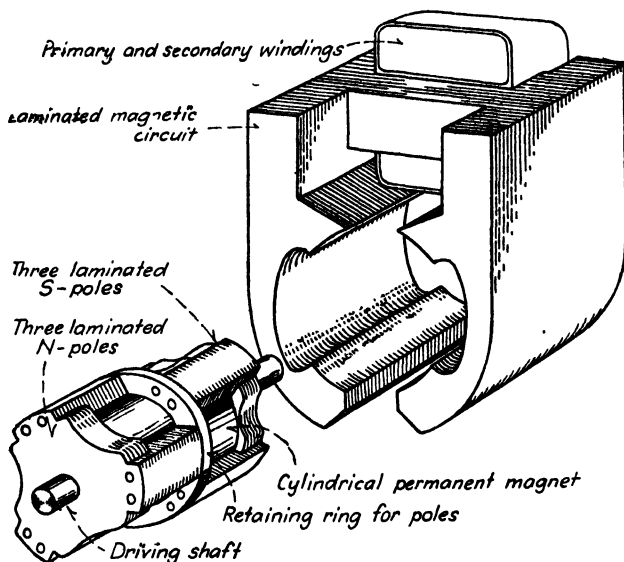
Six-pole camshaft-speed magnets for six-cylinder engine.
